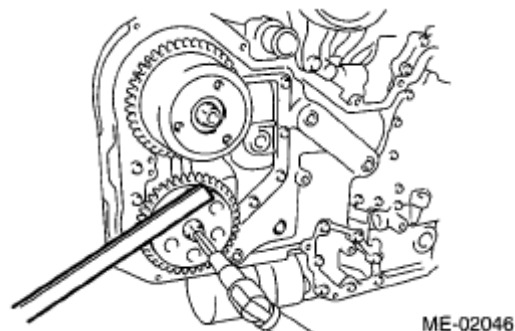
Identifying ST 18231Aa020 Cam Sprocket Wrench
